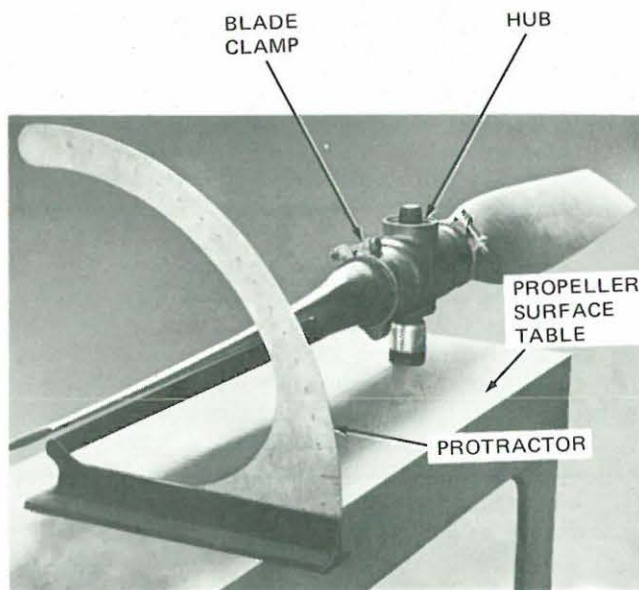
Adjustment of blade angle on a ground-adjustable propeller.
